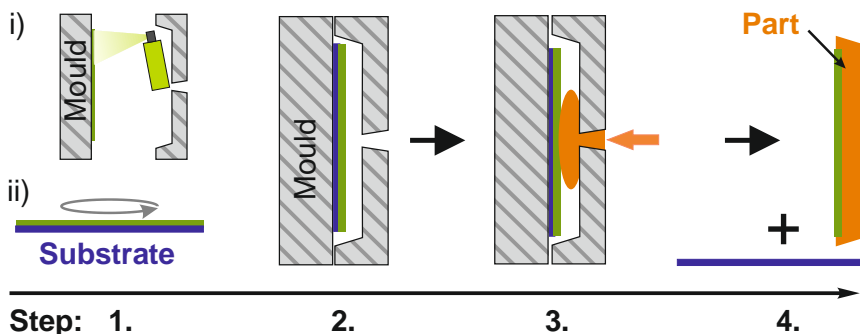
Processing steps of surface modification during molding. 1. Formation of thin film (10-100 nm) of modifier by either (i) spray-coating or (ii) spin-coating; 2. Modifier layer on mounted substrate or directly on mold surface; 3. Injection of the PEEK melt while initiating a coupling reaction, see also graphical abstract figure; 4. Demolding with transfer of the modifier layer to the part.
